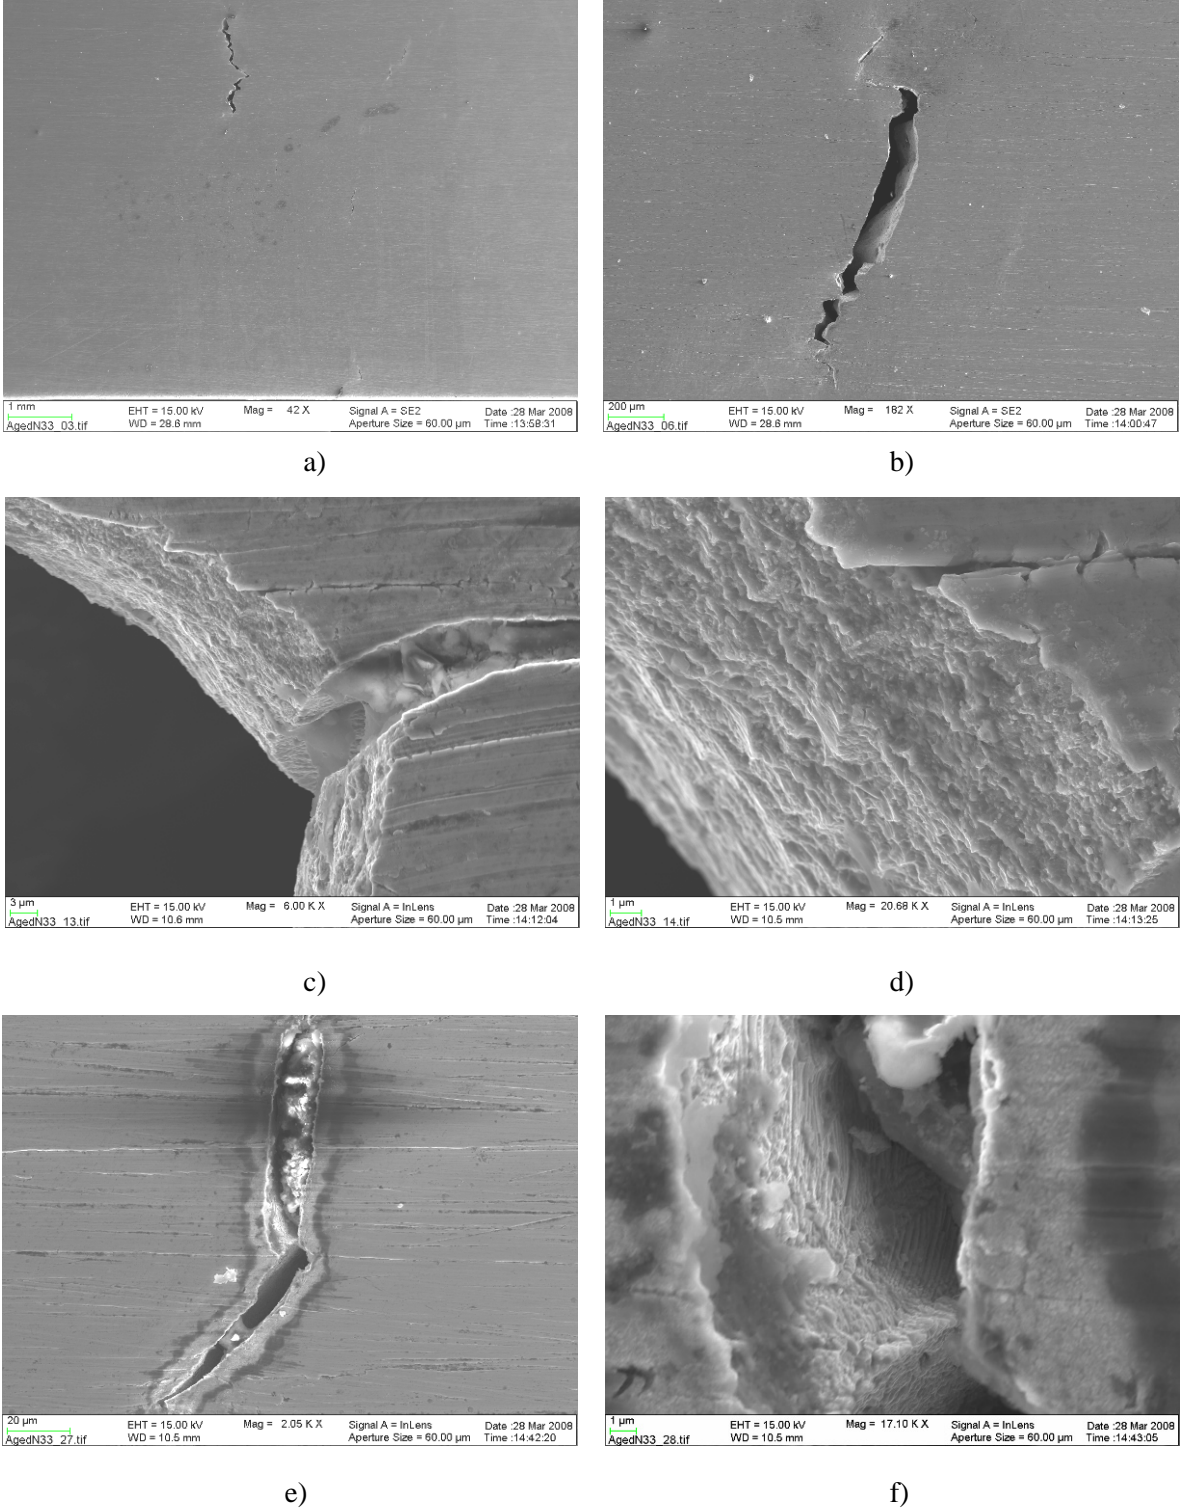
a)–f) Small weld defects (<1 mm) on the outer surface of Sample N33 (AISI 347 and Alloy 82 dilution zone) [5] caused by small slag inclusions show slag inside the defects and the surfaces of the defects are rough consisting of broken slag film.
